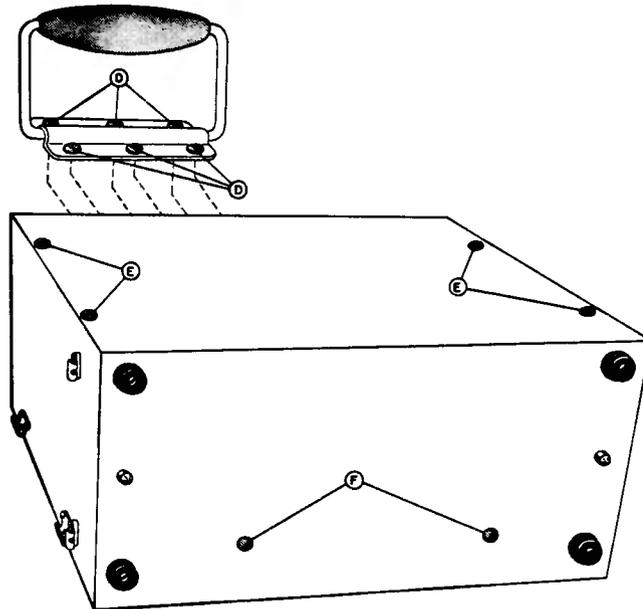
Rear-Bottom View for Removal of Test Set TS-687/TRM-1 from the Equipment Case
